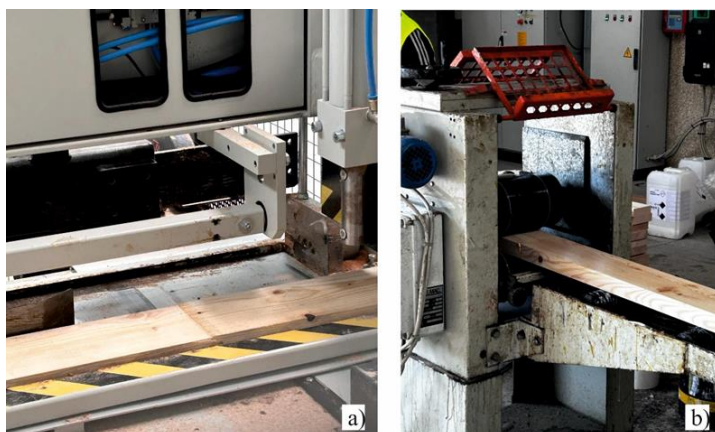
Glue-laminated timber beams: a) Manufacturing of finger joints and bonding; b) Face gluing.
